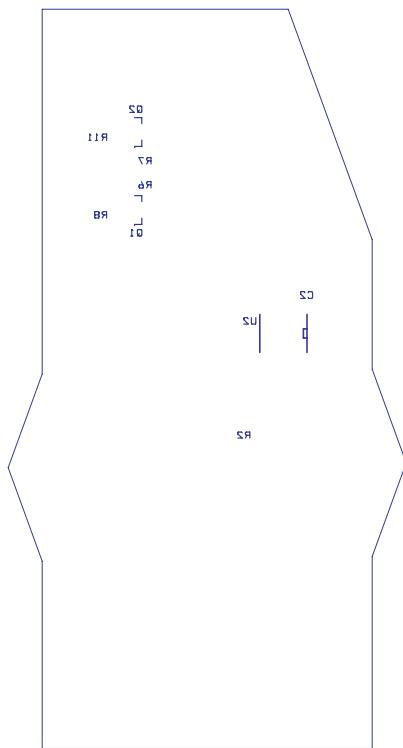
XBN2013A PCB Layout - Bottom Silk
